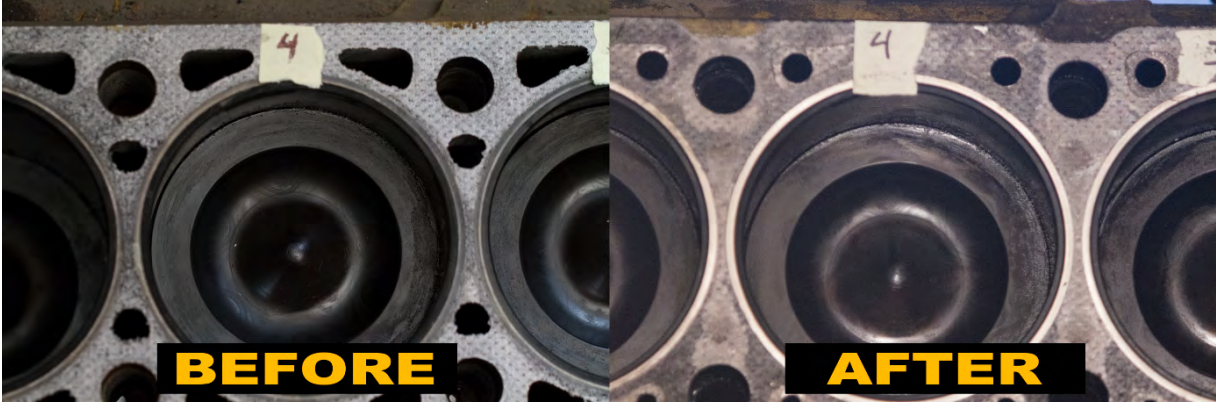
Before and After Pictures of Cylinder and Piston Head.
